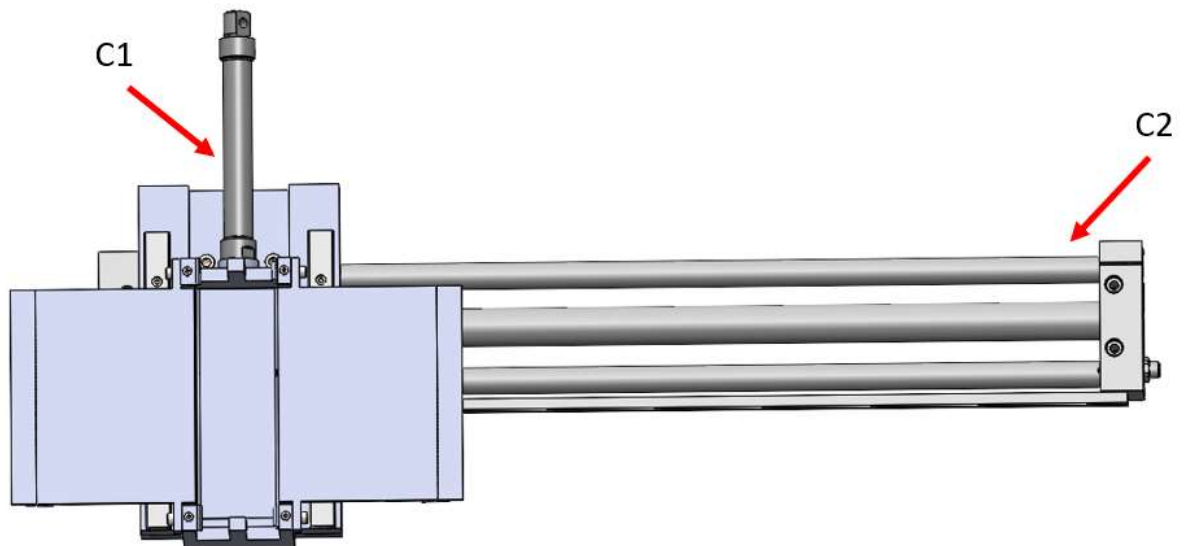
Position of C1 tape-pressing cylinder and D2 sliding cylinder
